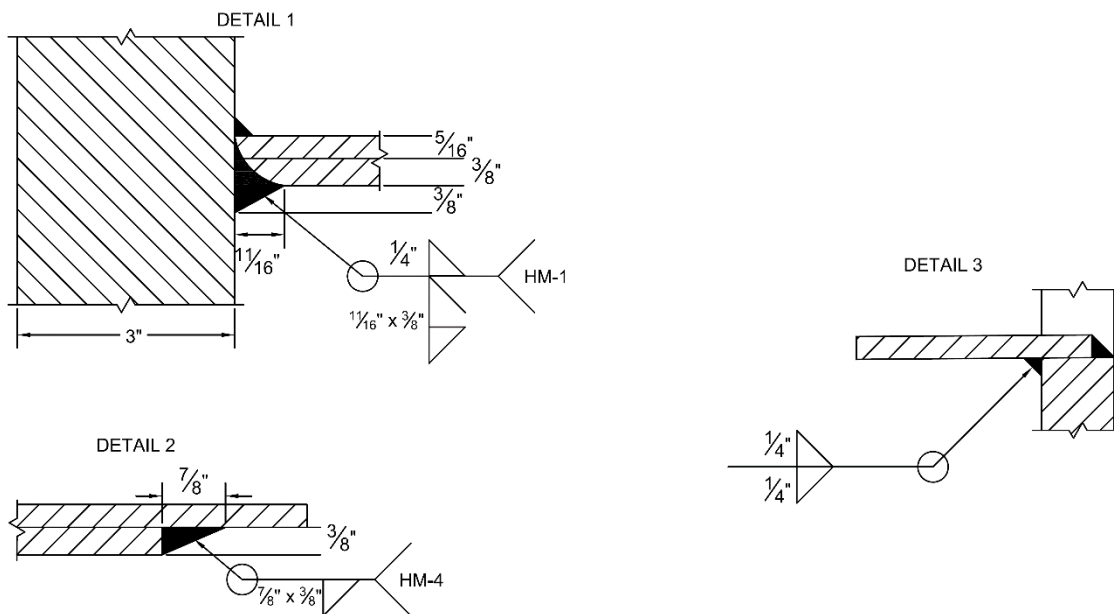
HMIP Fatigue Test Specimens of Secondary Interest – Weld Details on Both Ends
